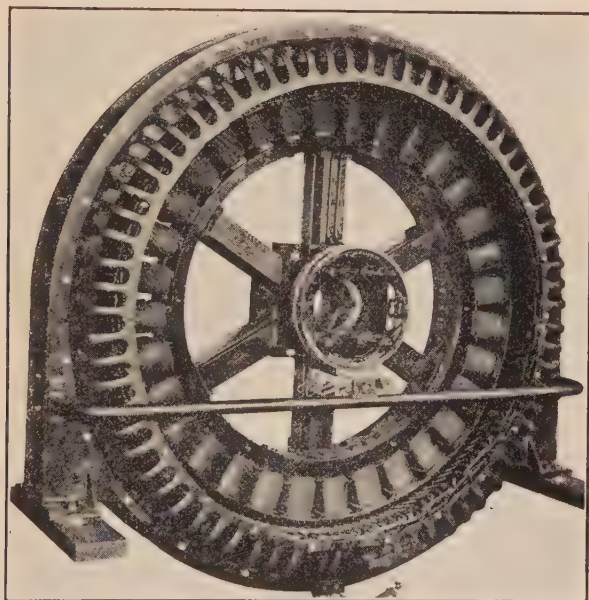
Synchronous motor showing welded frame construction. Type HR. (Westinghouse Electric and Manufacturing Company.)
